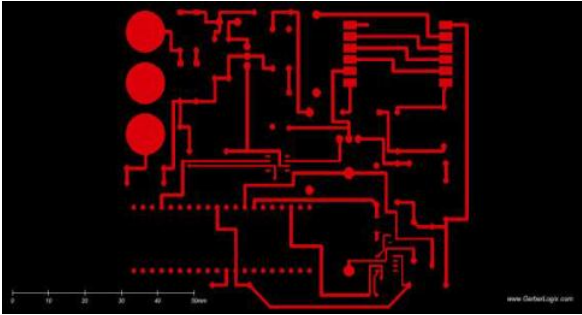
Arrangement of Components and Routing on the PCB.
